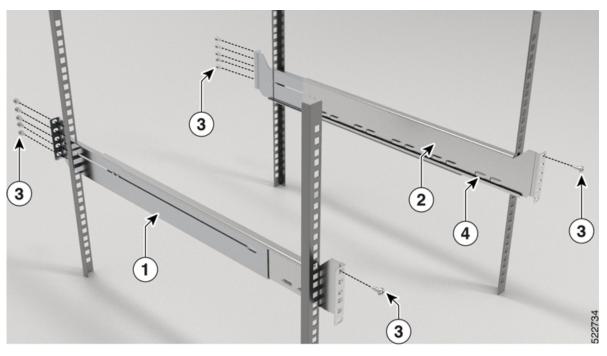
Rack-Mount Slider Assembly on a 19-inch 4-Post Rack
